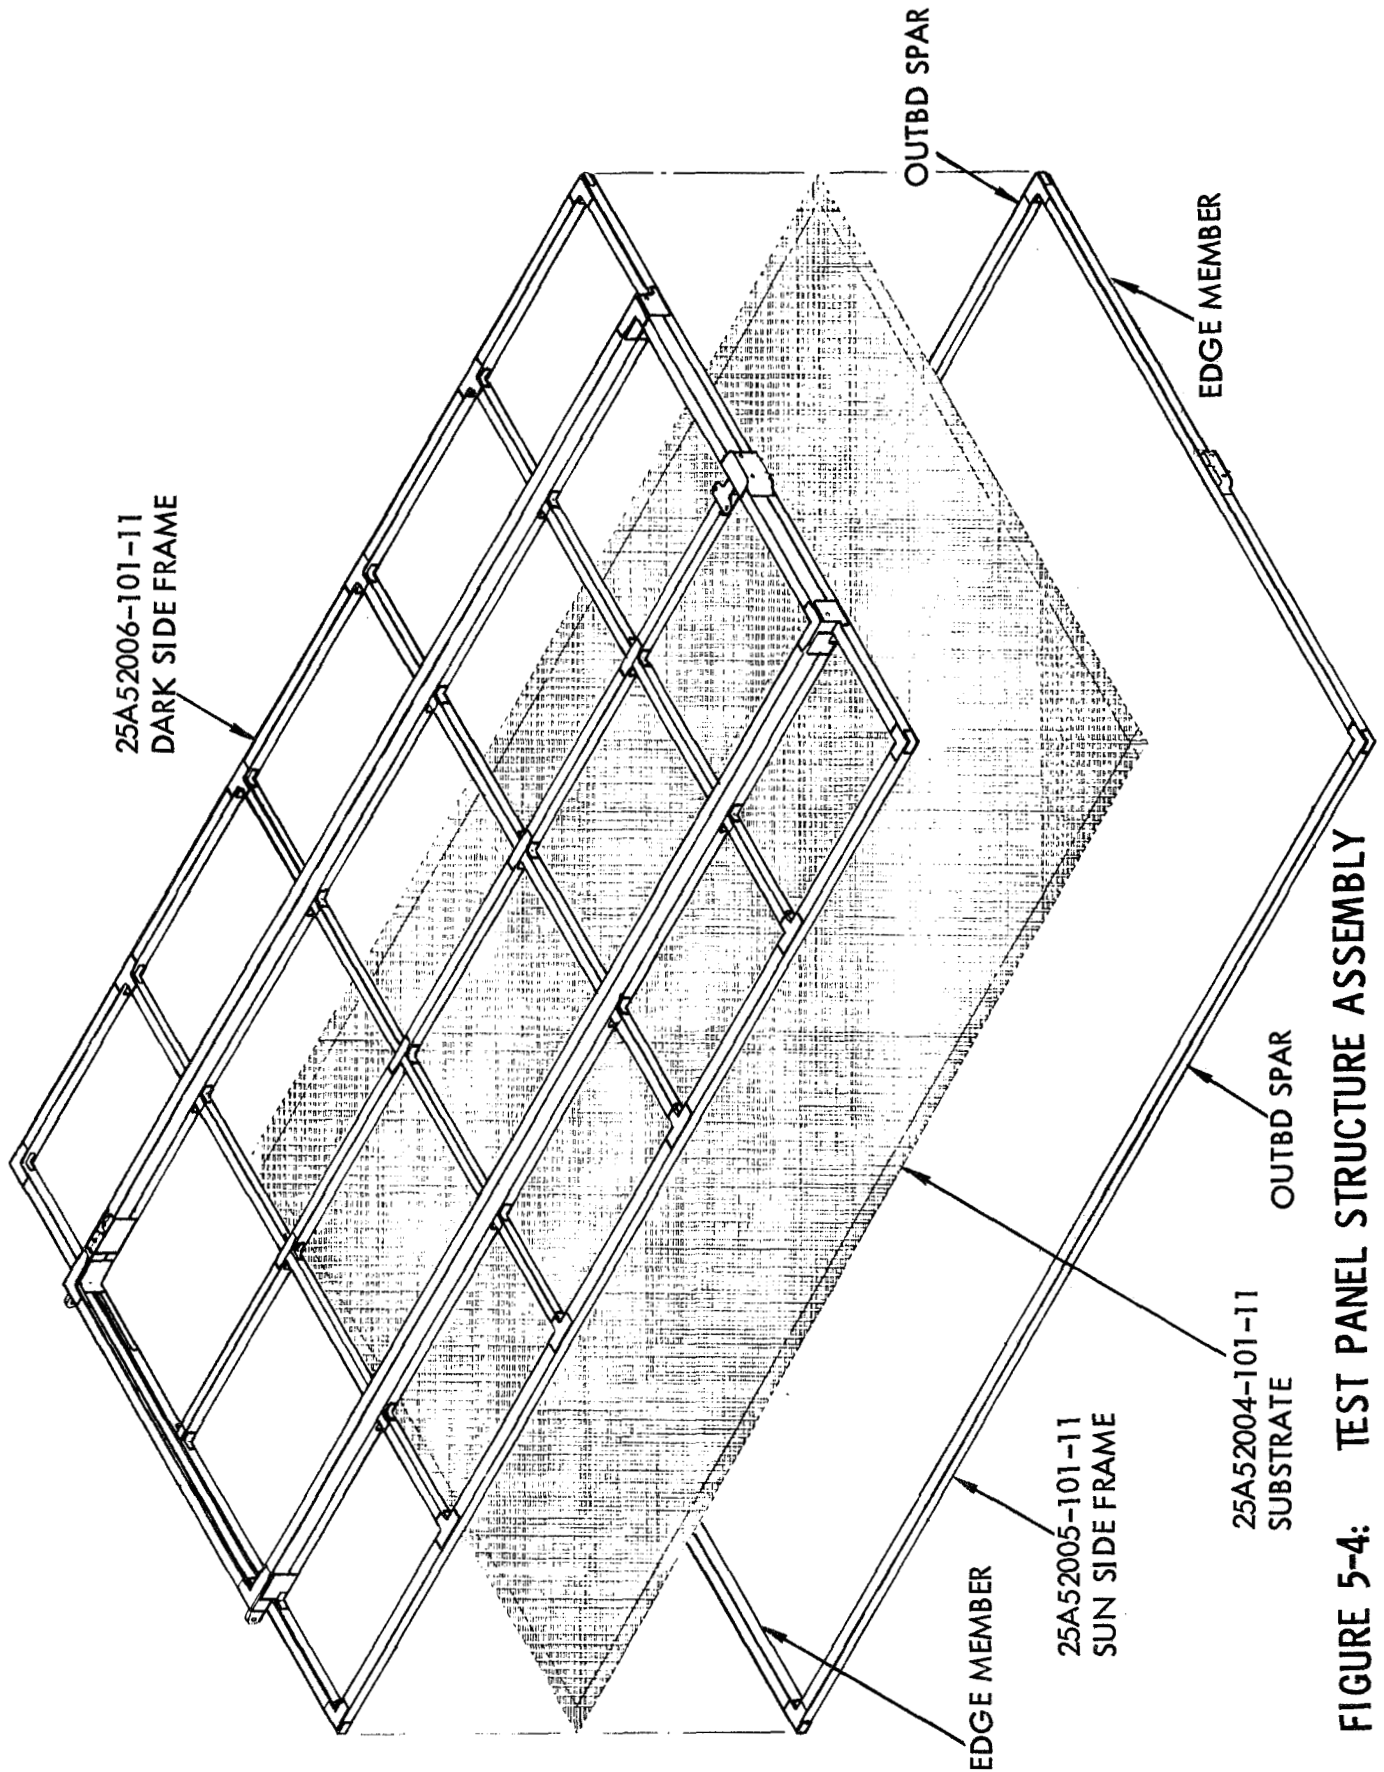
TEST PANEL STRUCTURE ASSEMBLY
